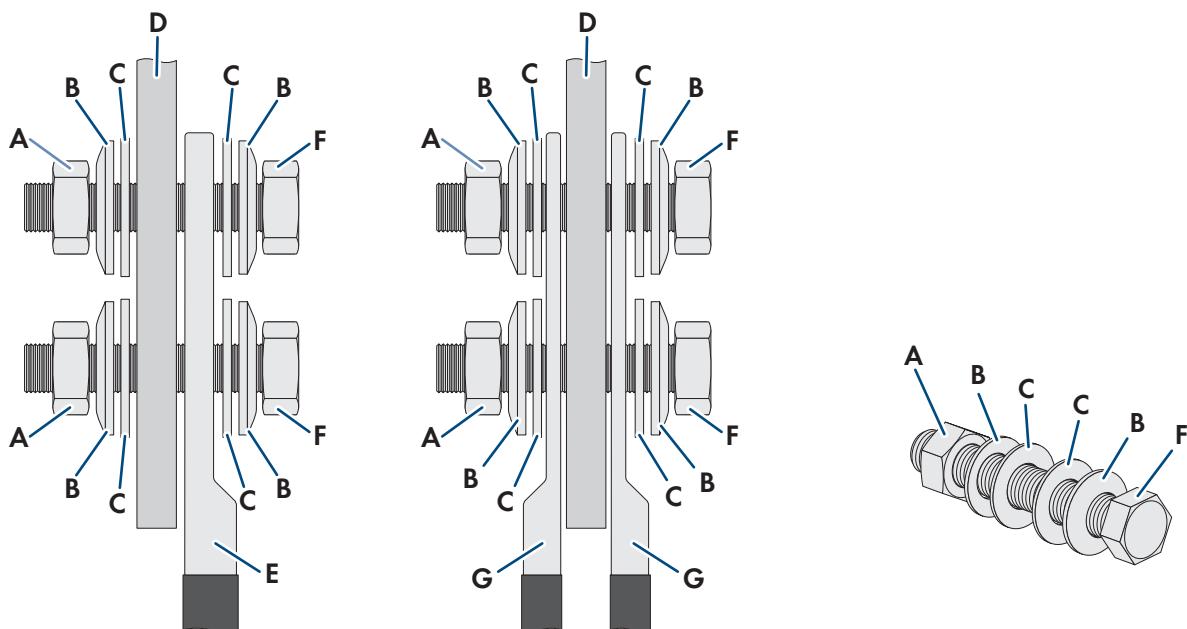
Assembly of the bolted connection with two-hole terminal lugs
